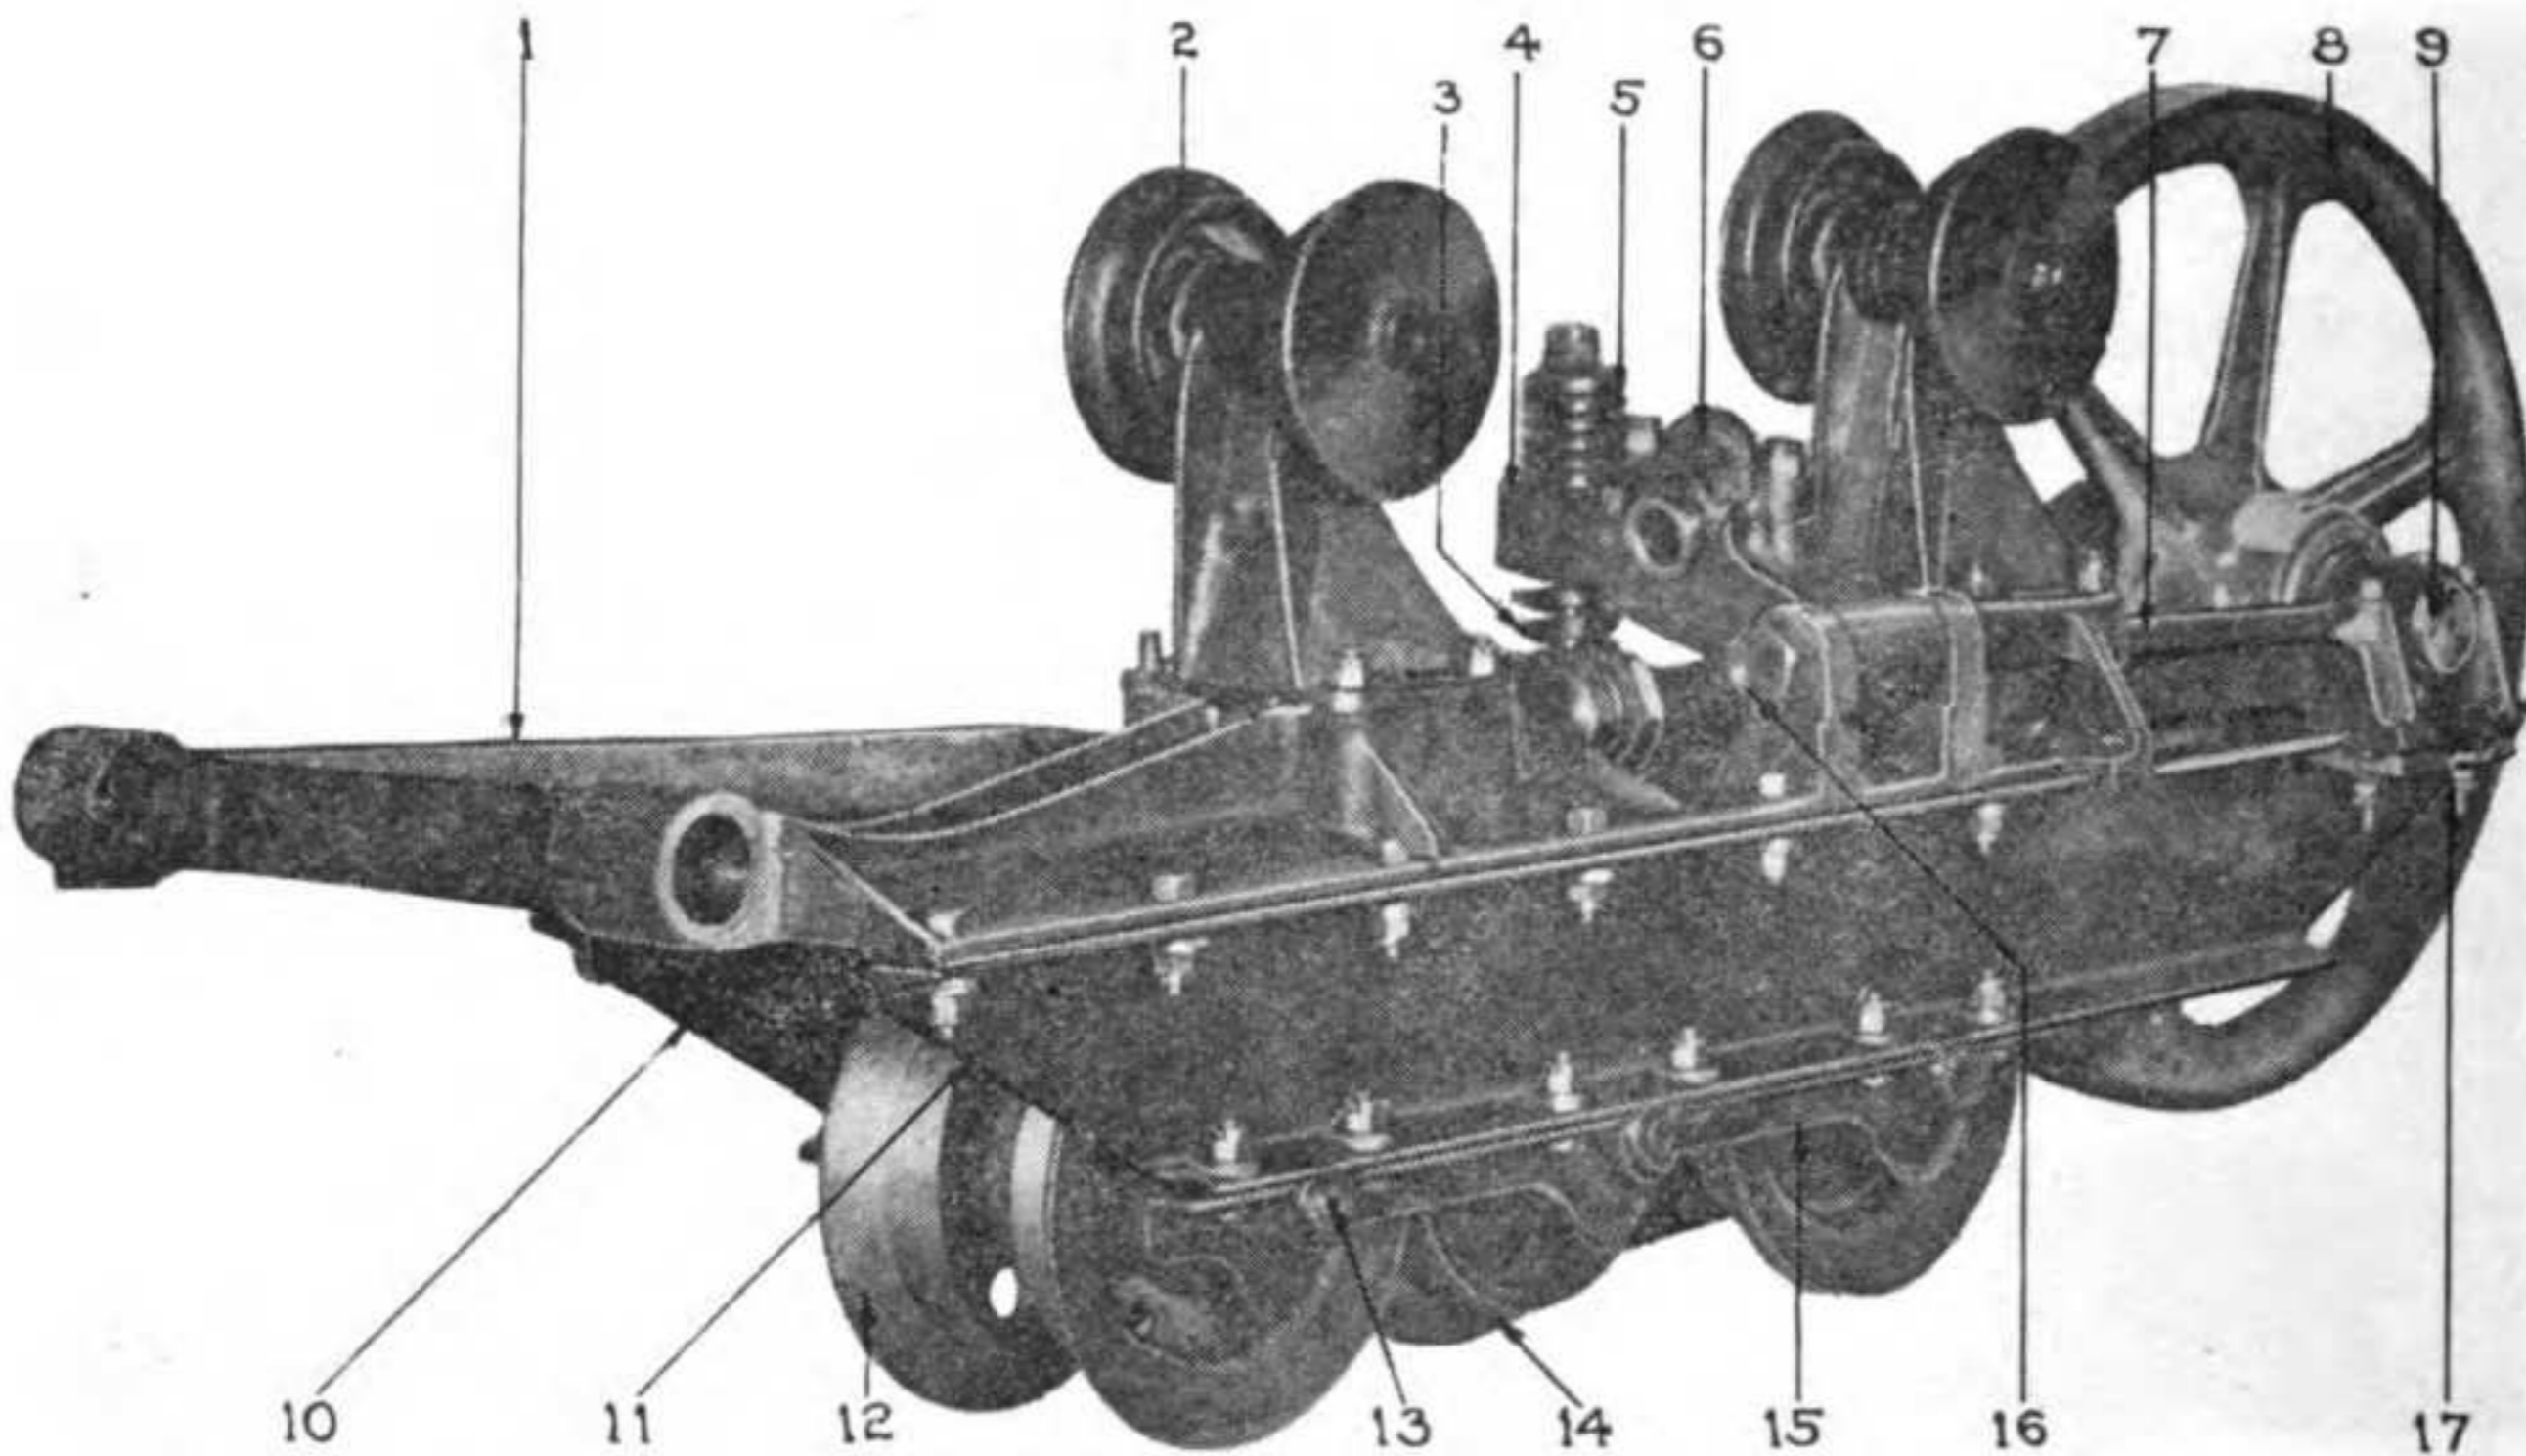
FRONT ROLLER FRAME ASSEMBLY
